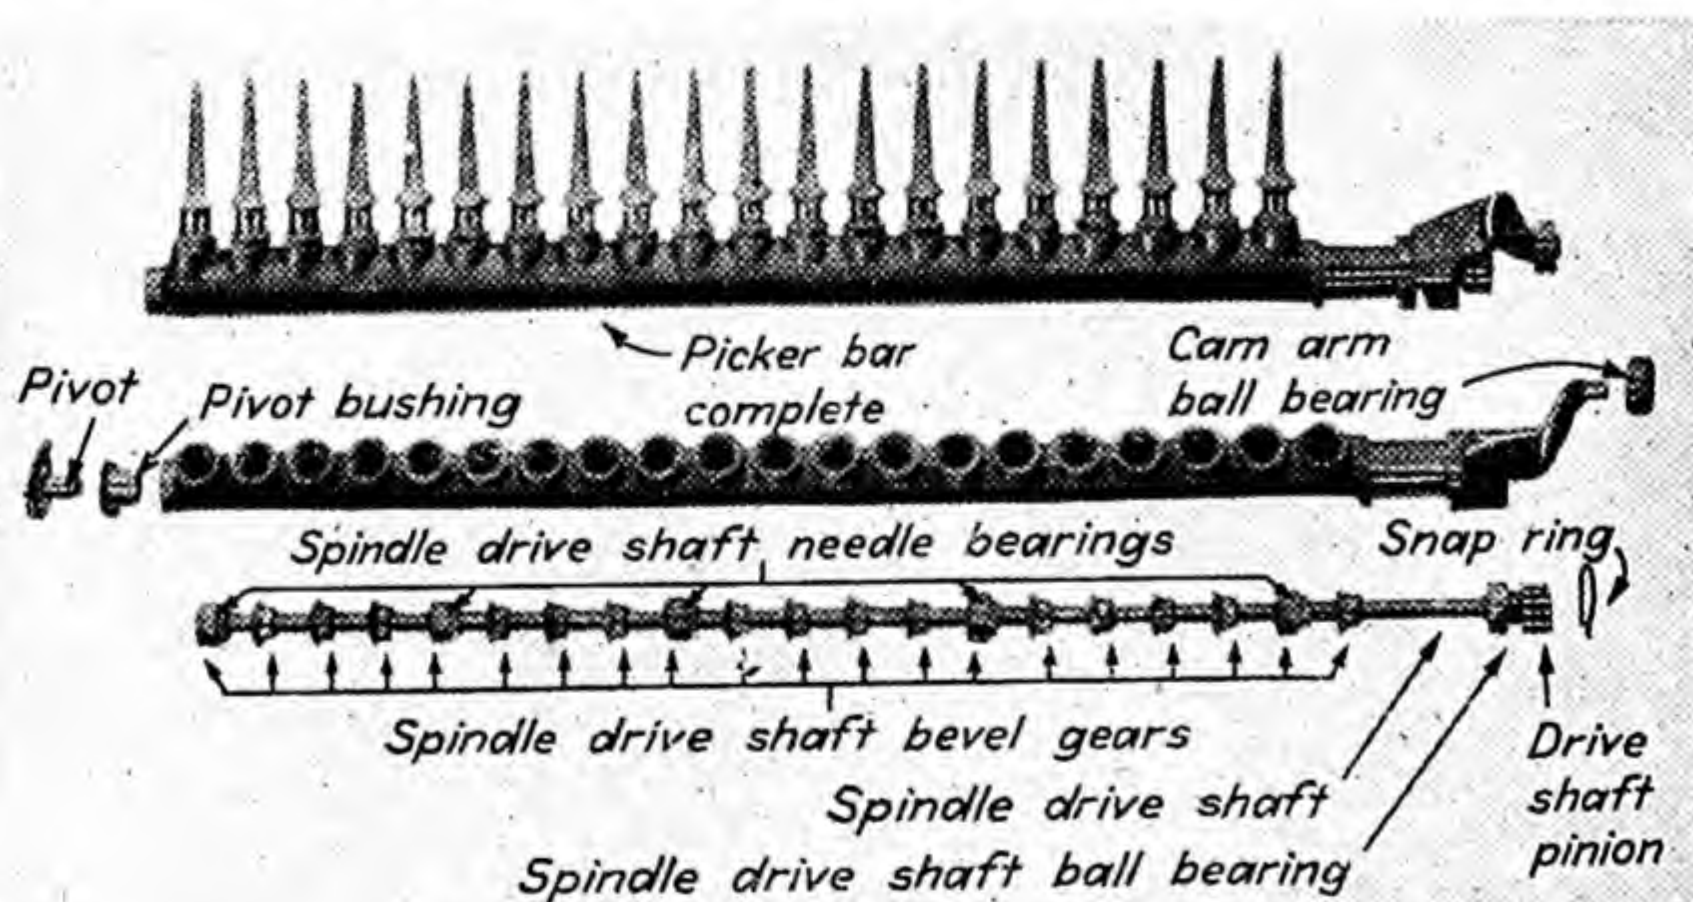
Picking bar complete with spindles and gear shaft removed from bar.
